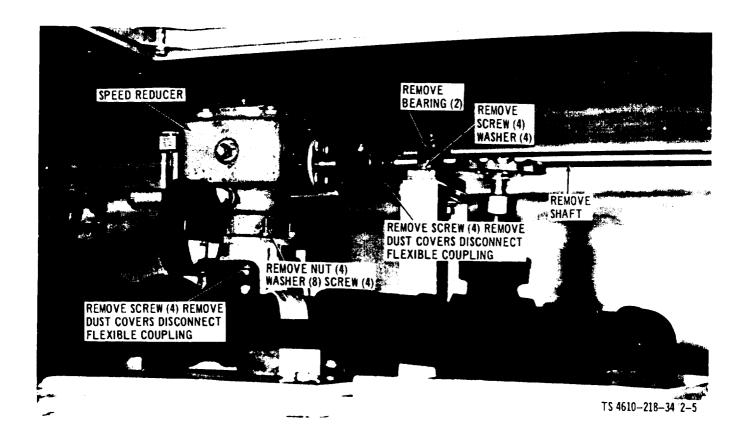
Erdlator Agitator Drive Shaft and Speed Reducer Assembly, Removal and Installation
